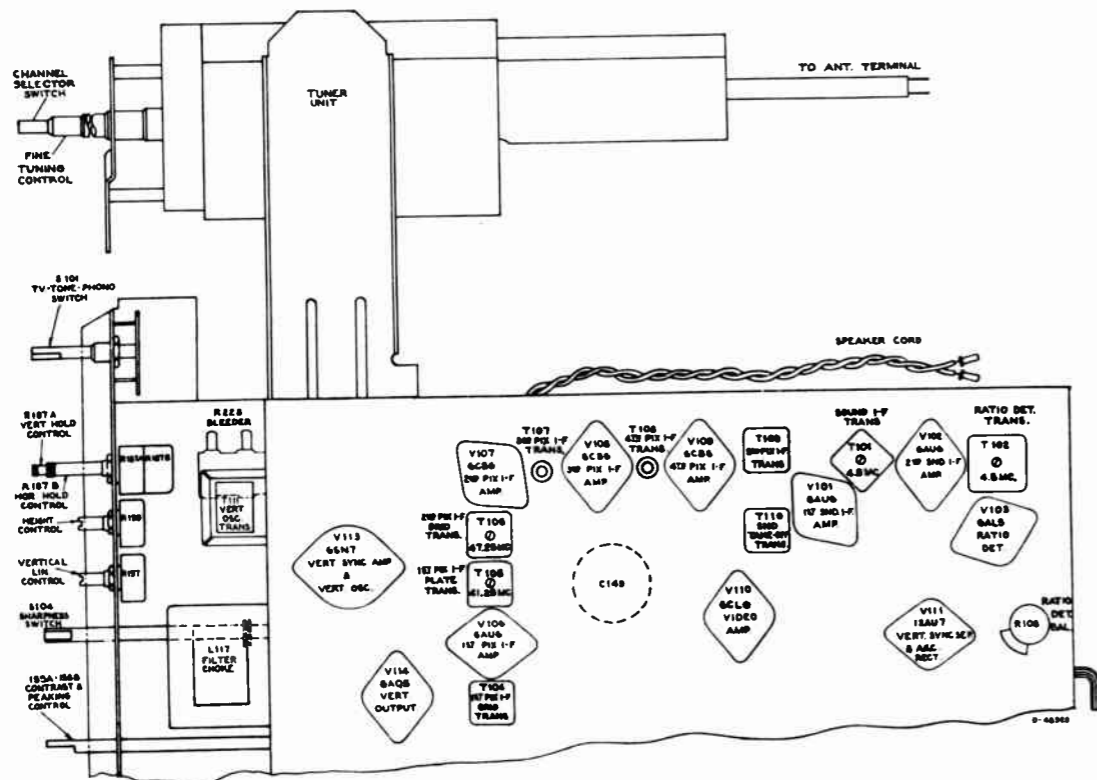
Bottom Chassis Adjustments (KRK29B Tuner Shown)
